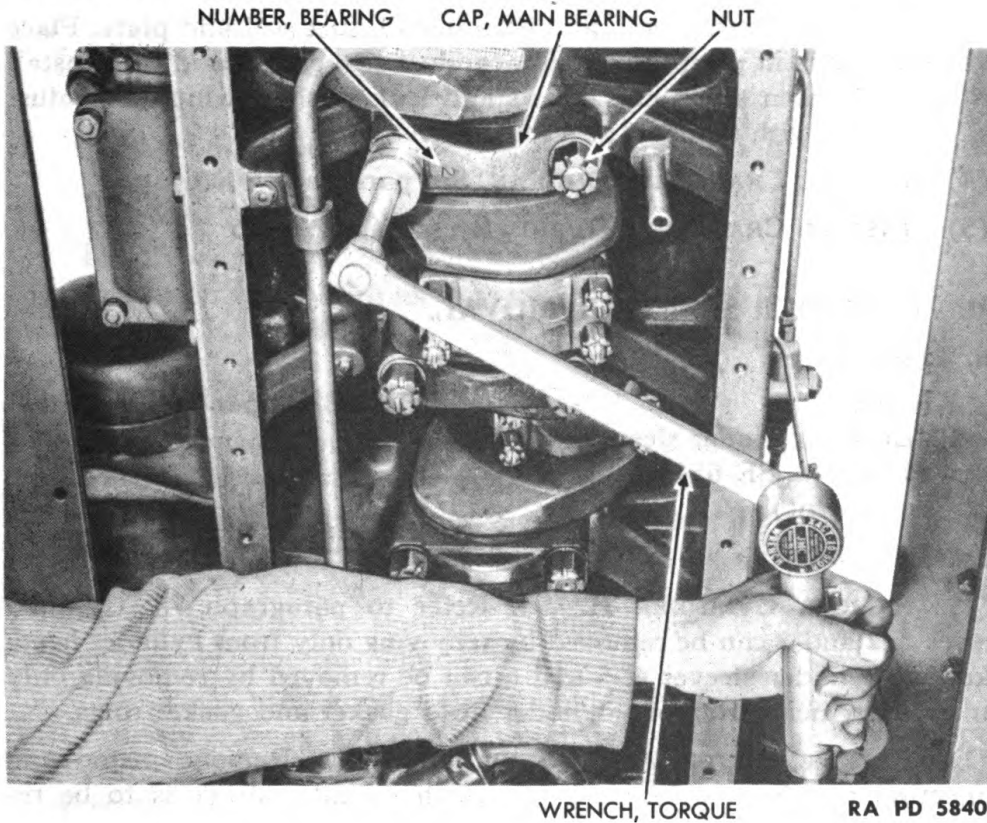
Tightening Main Bearing Cap Nut with Tension Wrench
